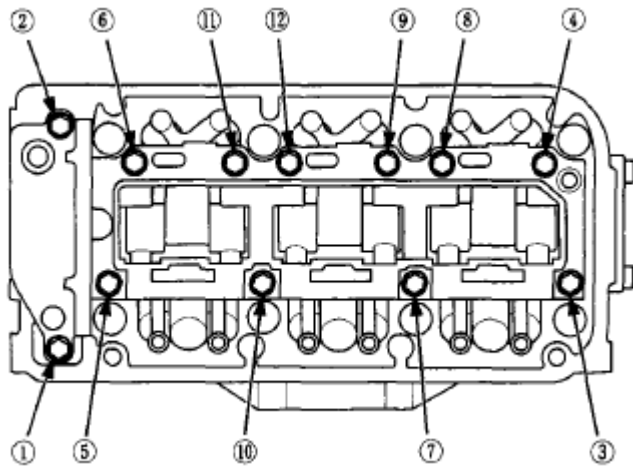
Identifying Rocker Shaft Bridge Mounting Bolts Tightening Sequence
